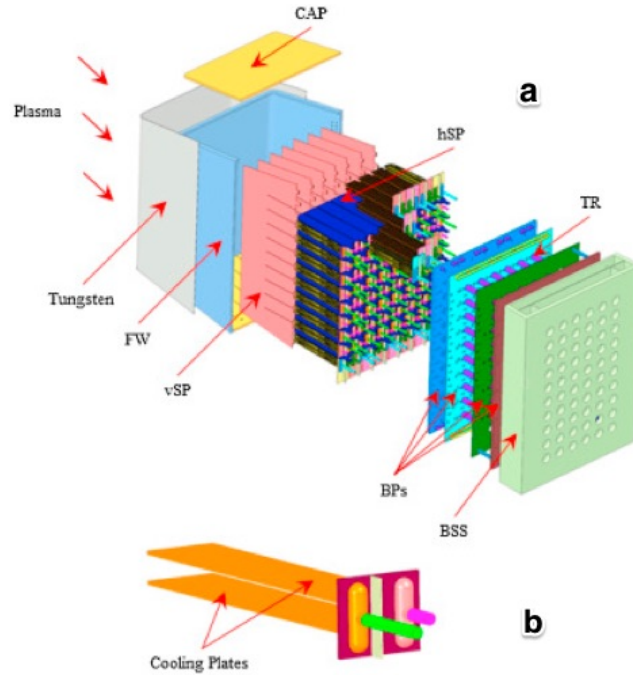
a) HCLL Blanket Module; b) Detail of cooling plates configuration in the breeder unit. [15]
